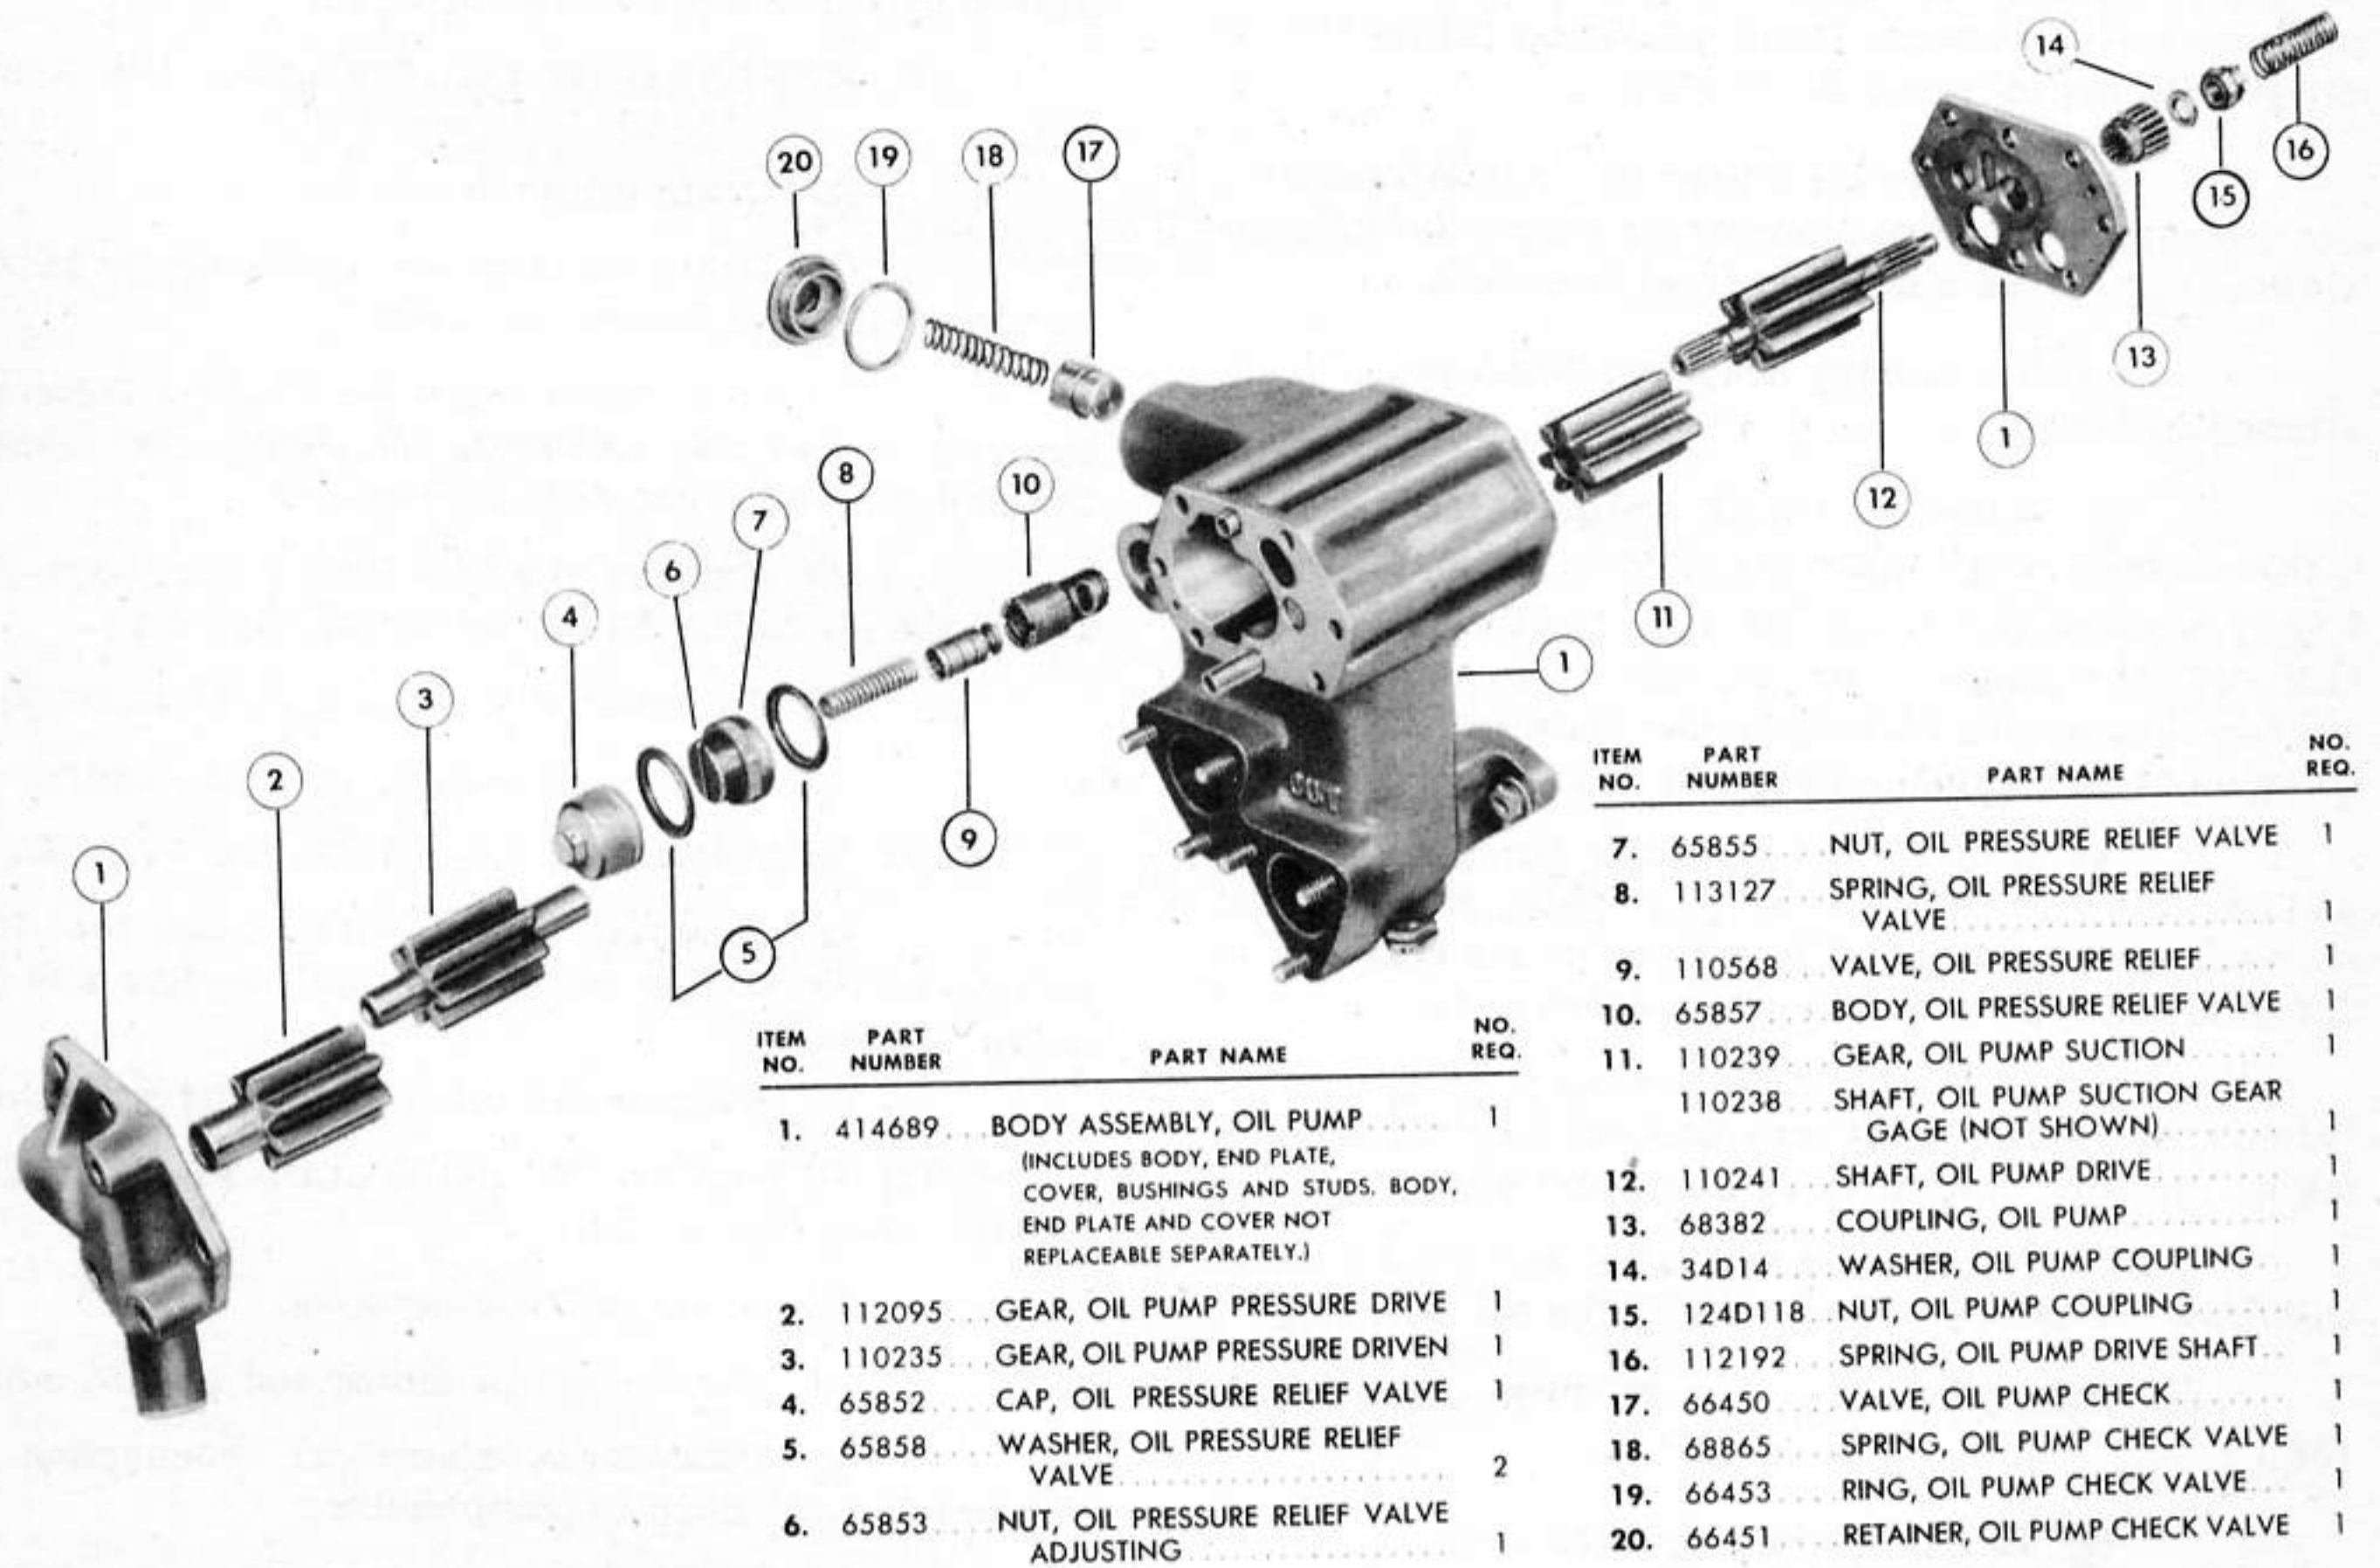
EXPLODED VIEW OF ENGINE OIL PUMP
